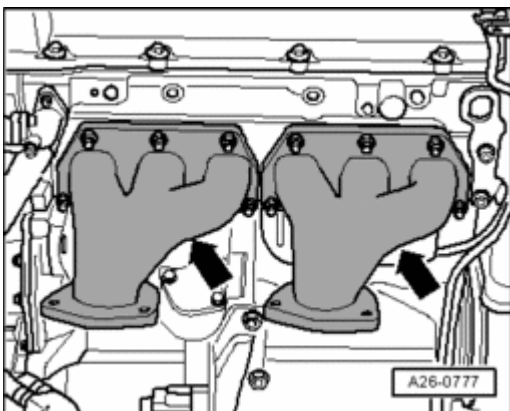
Unscrewing Nuts On Both Exhaust Manifolds And Removing Together With Washers
